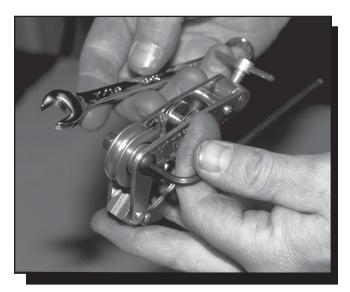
Place a lock washer and nut on the button-head cap screw and tighten the nut, using a $\frac{5}{32}$ -inch hex key to secure the cap screw and a $\frac{7}{16}$ -inch wrench to turn the nut.
